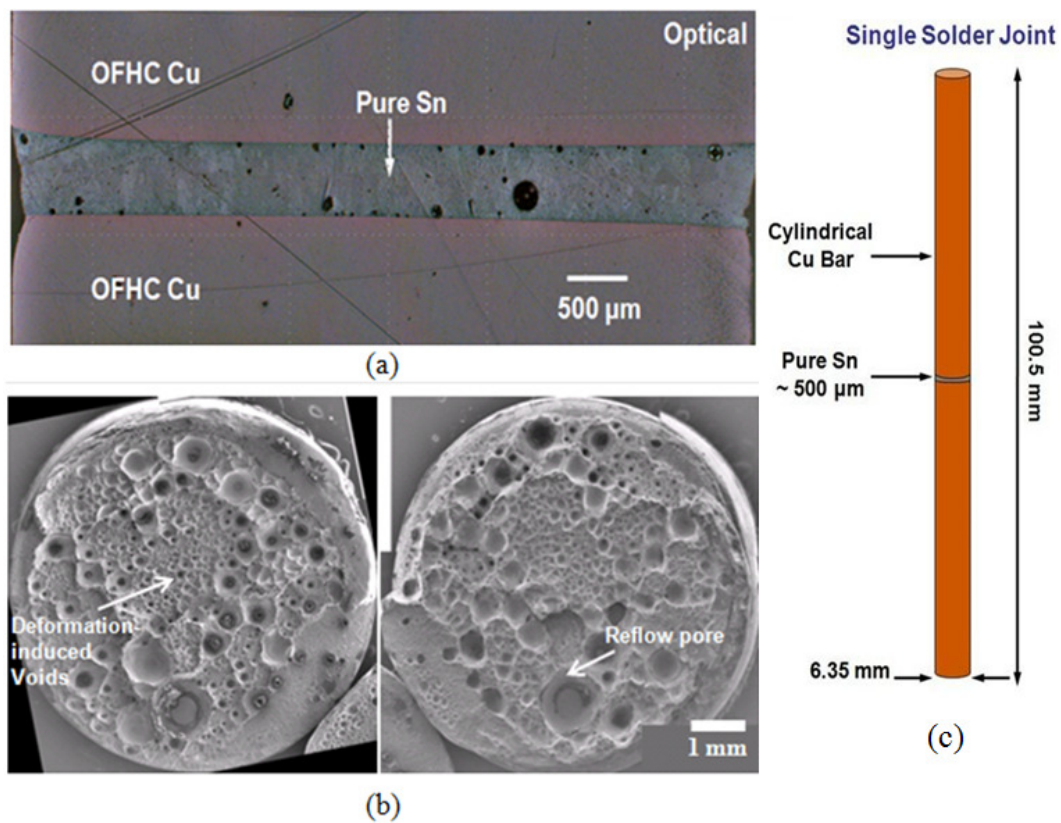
A sandwich joint of Cu/Sn/Cu. (a) Optical image of the side view of the joint. (b) Scanning electron microscope image of the crack surface. (c) The overall geometry of the single solder joint. (Courtesy of K. Yazzie)
